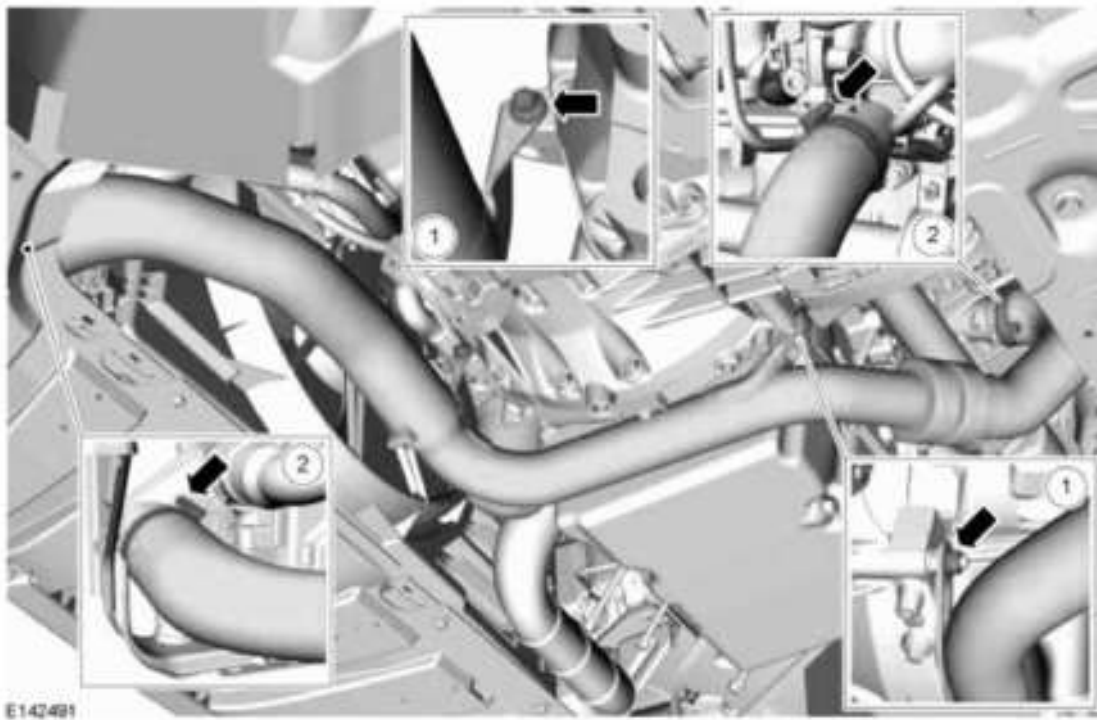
Locating Turbocharger Hoses Clamps And Bolts
